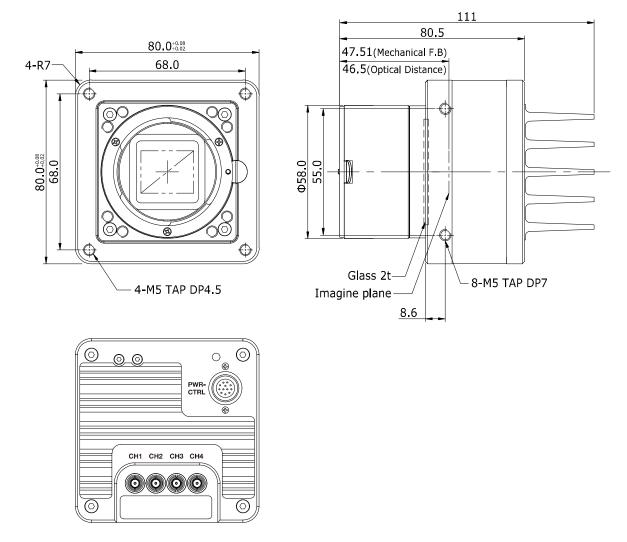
VC-21MX2-M/C230I-HS Mechanical Dimension
